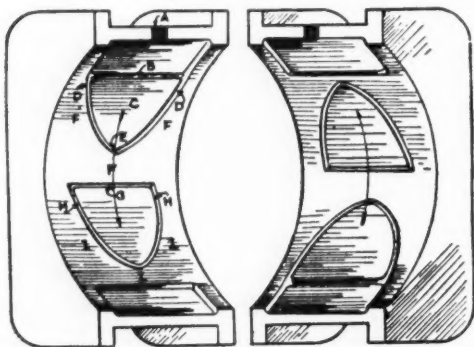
Crank-pin boxes of a connecting rod showing oil grooves. Oil enters at "A"; is accumulated in the primary groove "B"; by rotation of the pin from there it is spread in both directions within the clearance space to cover surface "C." "D-D" are secondary grooves which carry oil back to the center of the bearing at "E" and at the same time maintain a film of oil over surfaces "F, F, F." From here oil works into primary groove "G" and thence to secondary grooves "H, H" where the course of development of the film is repeated as above.
